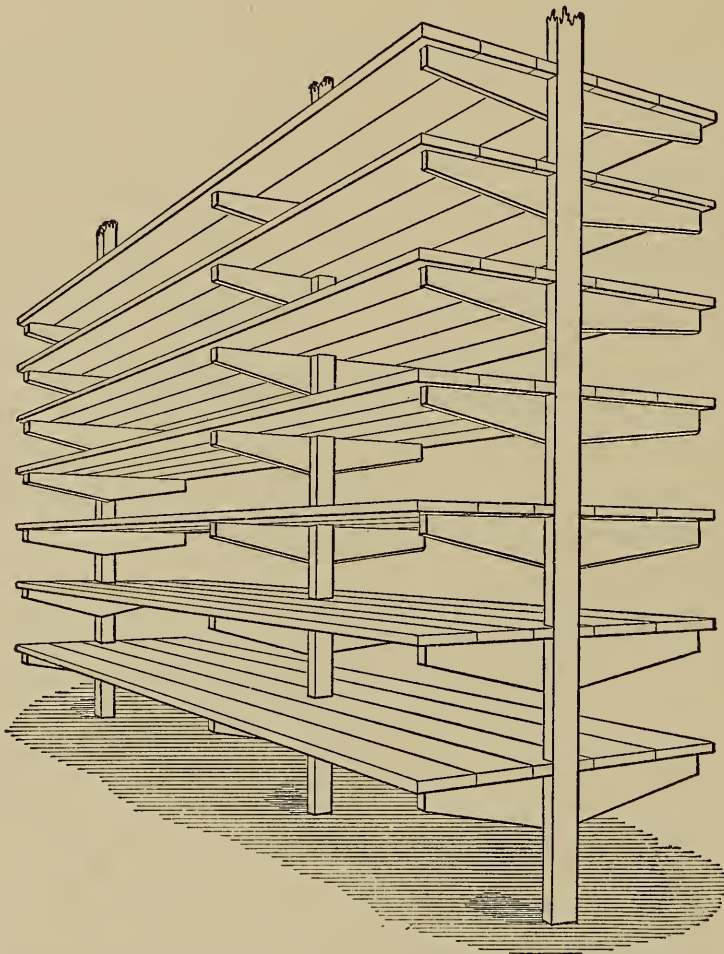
Pattern Storage Rack, all Wood Construction.
